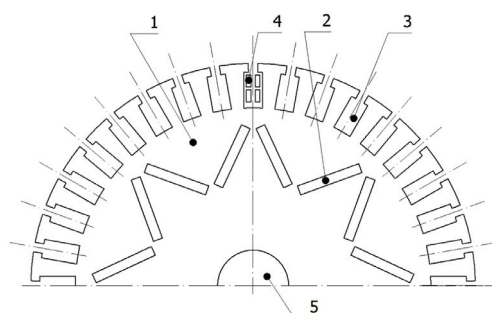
Cross-section of the VPM motor rotor core with V-shape permanent magnets [1]
